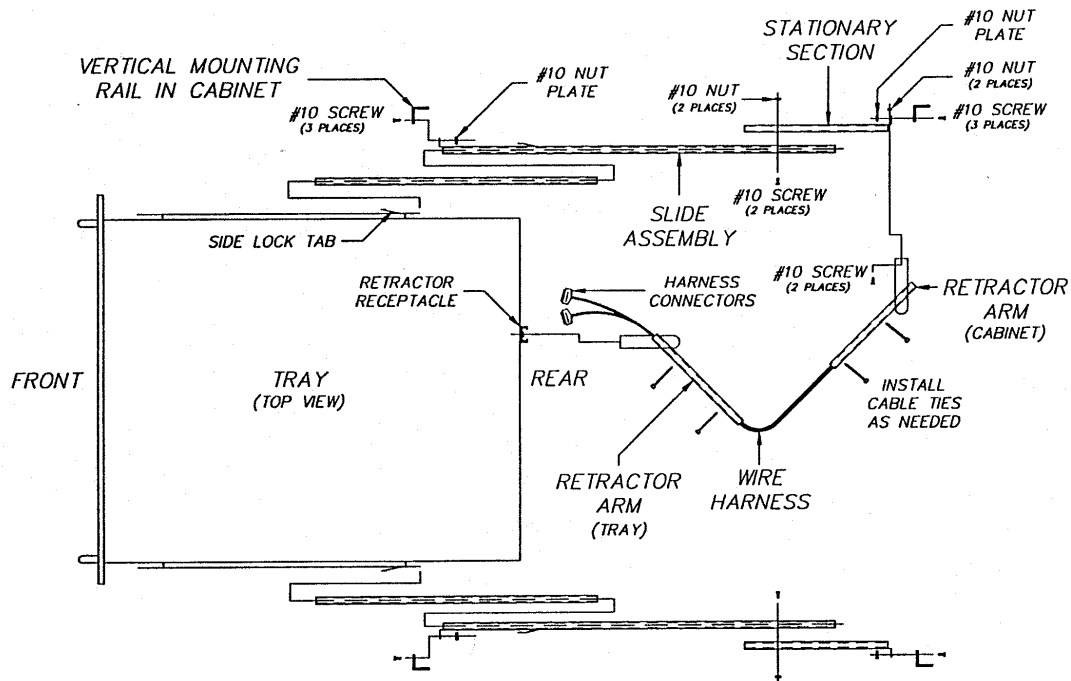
Tray Slides Cabinet Mounting Diagram
